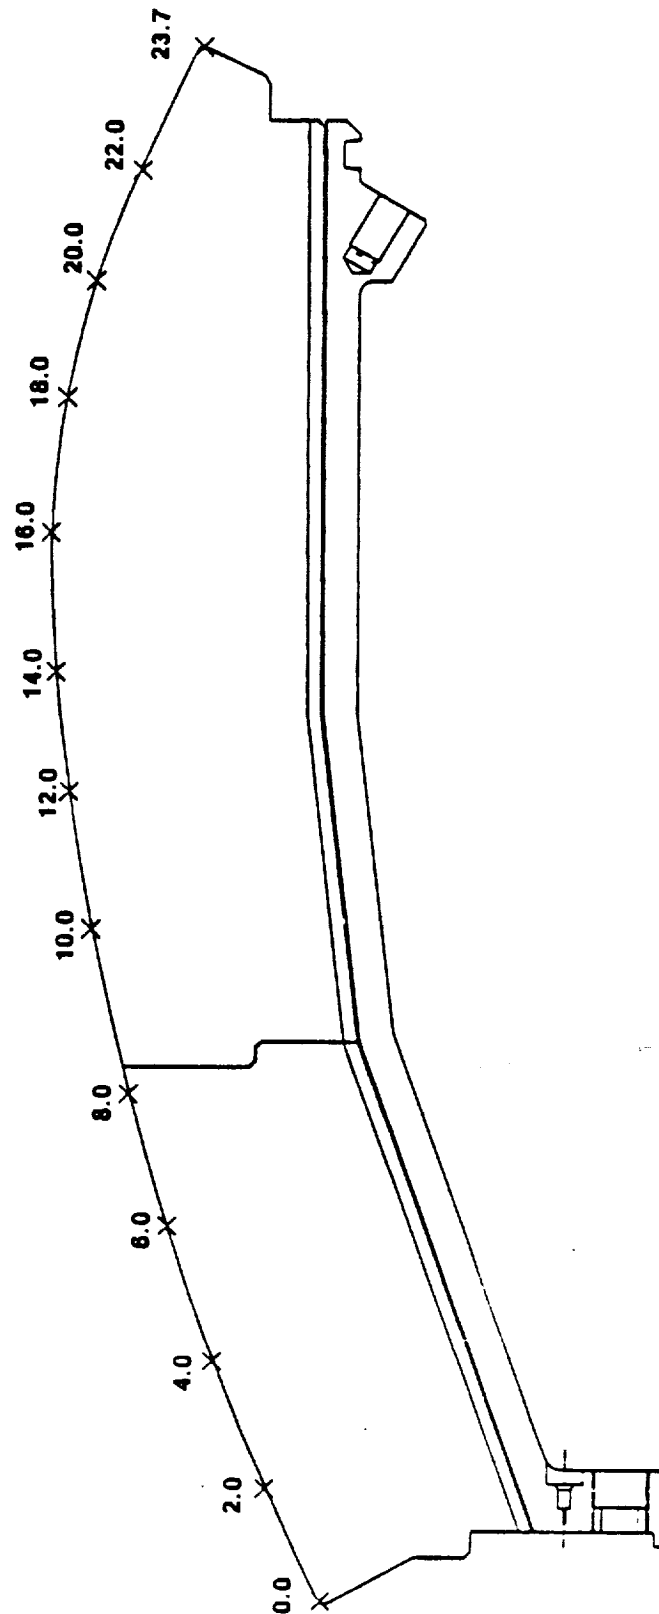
STS-28A Throat Inlet Assembly Erosion Measurement Stations
